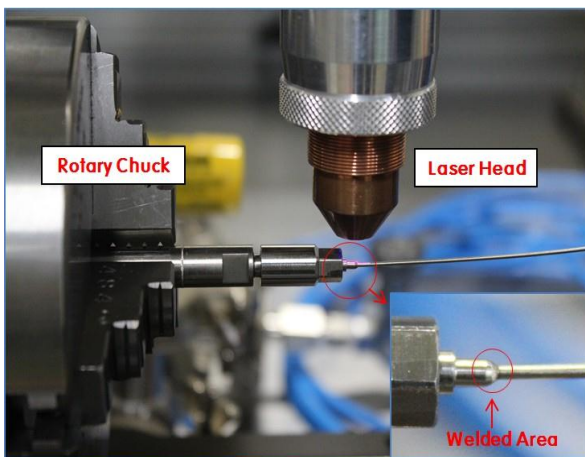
Specimen fixed in a rotary chuck of the laser welding system and sealing surface sealed between a seal tube and an MI cable
